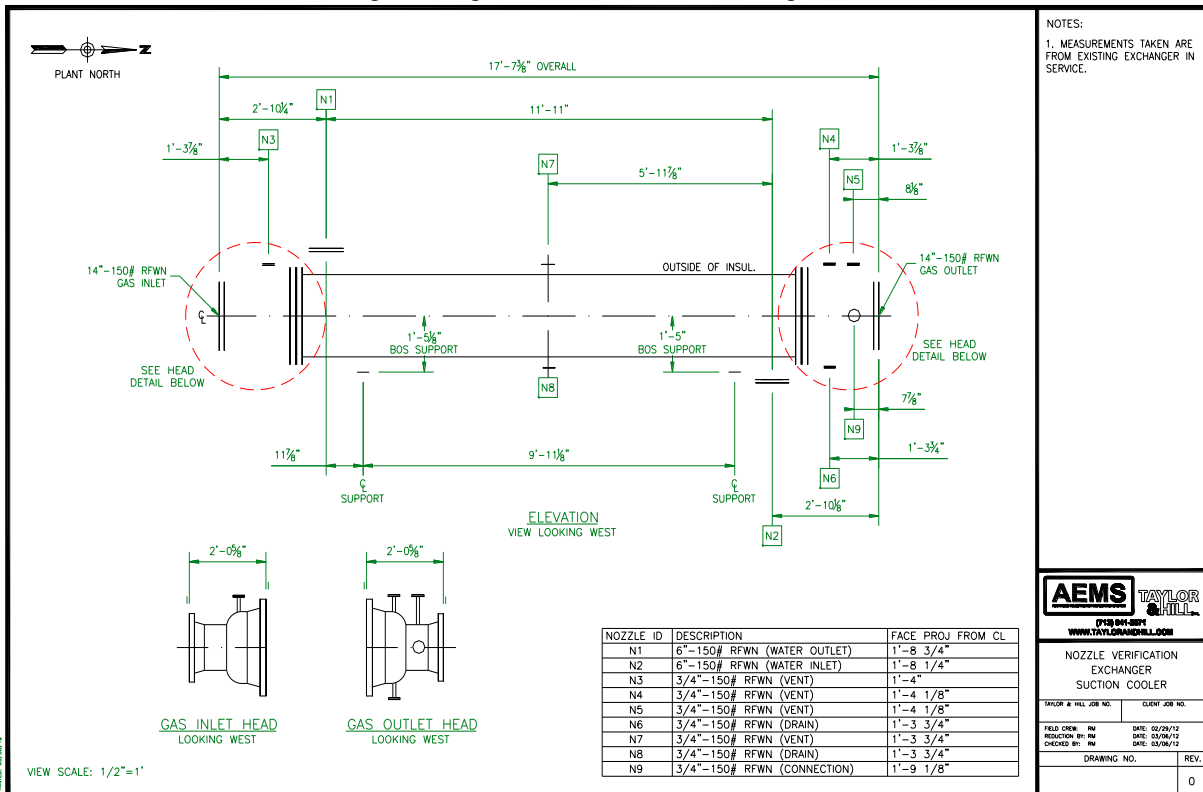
Final CAD drawing delivered to the client showing nozzle locations and sizes
